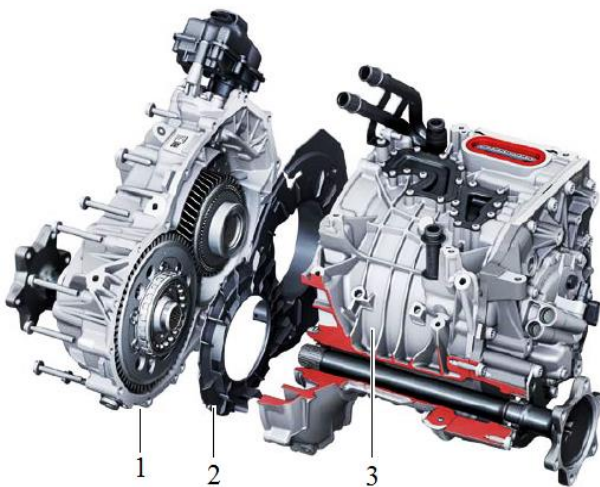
a. Electric motor transmission assembly for the front drive axle, [50]:
